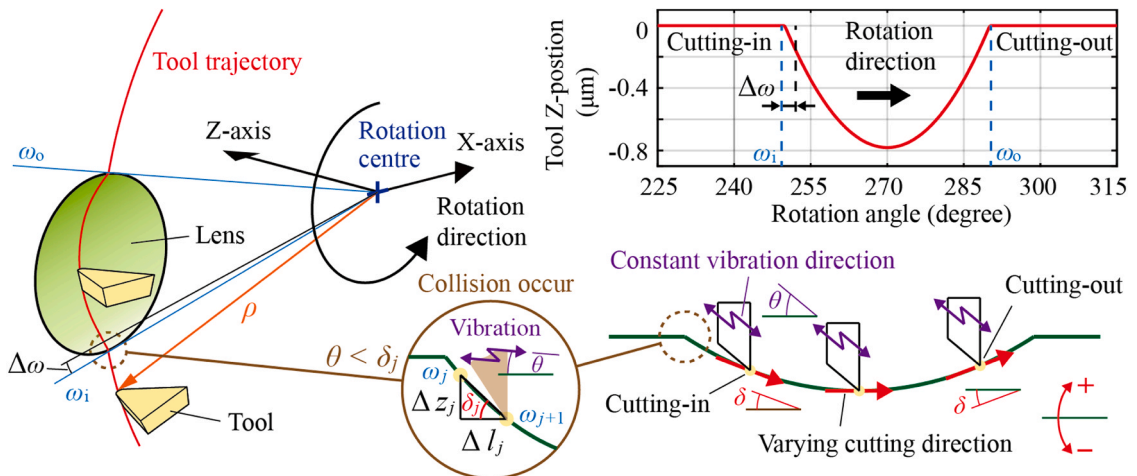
Schematic illustrating the tool trajectory during lens machining using a slow tool servo, and the direction of ultrasonic vibration of the tool relative to the lens surface.
